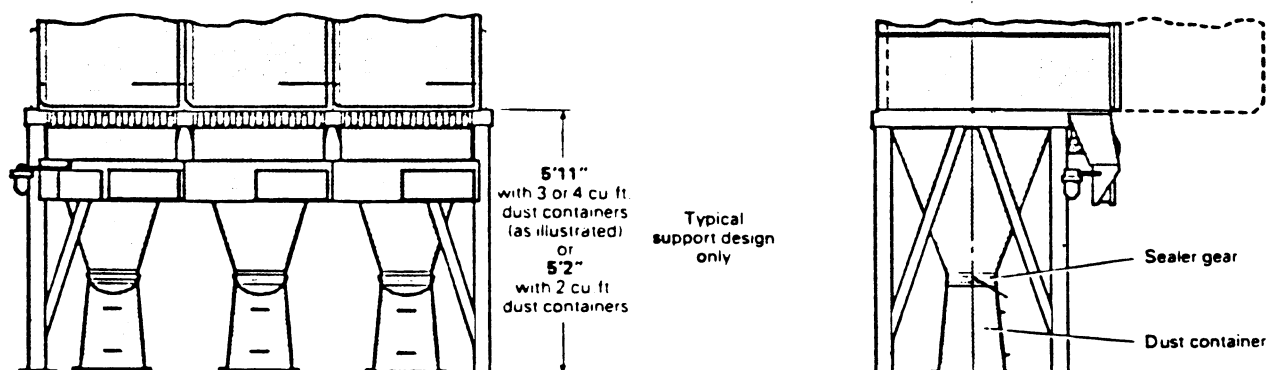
DCE 'UMA' type dust containers with quick-release sealer gear
